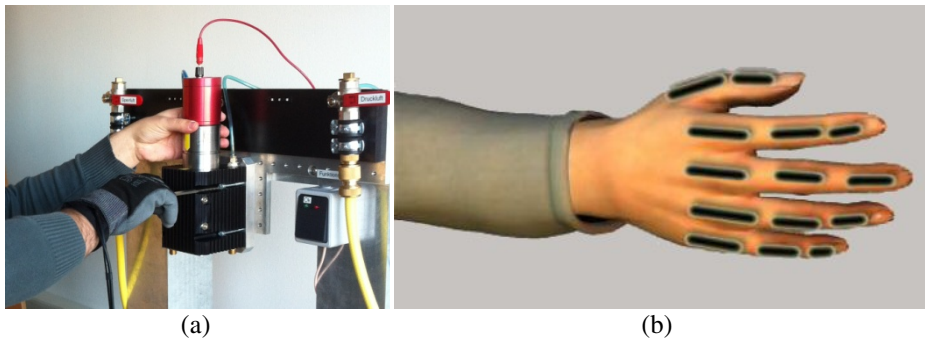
(a) The micro milling machine and the data glove while the operator is replacing the spindle; (b) the distribution of bend sensors on finger joints
